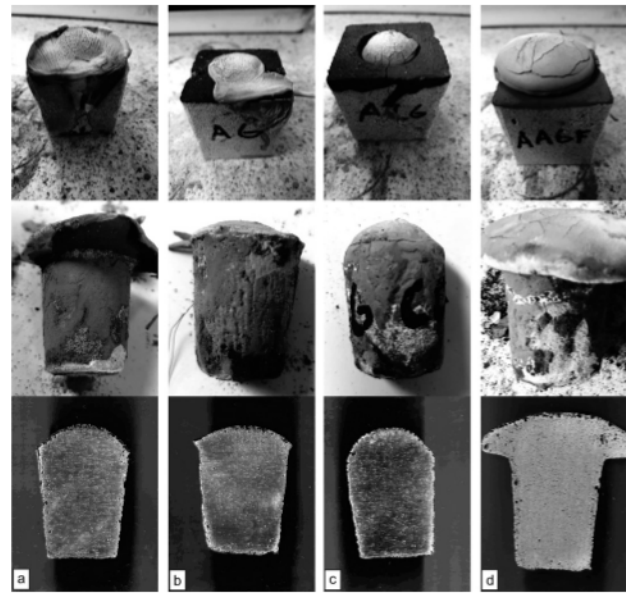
CO₂ moulds with castings and casting cross-sections: a) without coating, b) AG coating, c) AZG coating and d) AAGF coating
